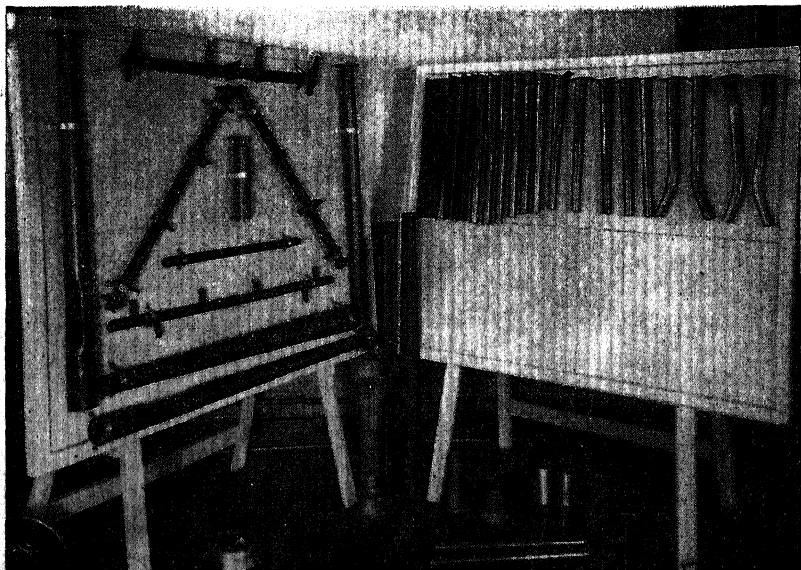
Display of tubular parts made of strip steel formed into tubes and automatically welded with a shielded carbon arc.
